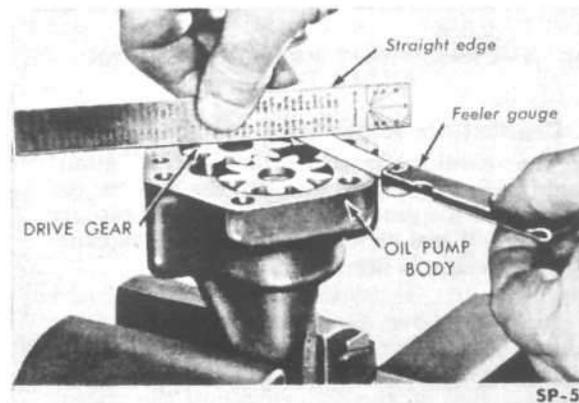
CHECKING GEAR TO COVER CLEARANCE
